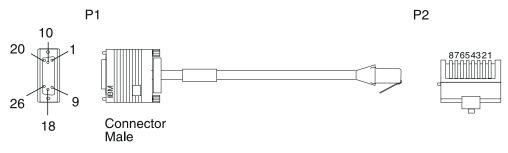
RJ-48 Twisted Pair T1 and J1 Cable
